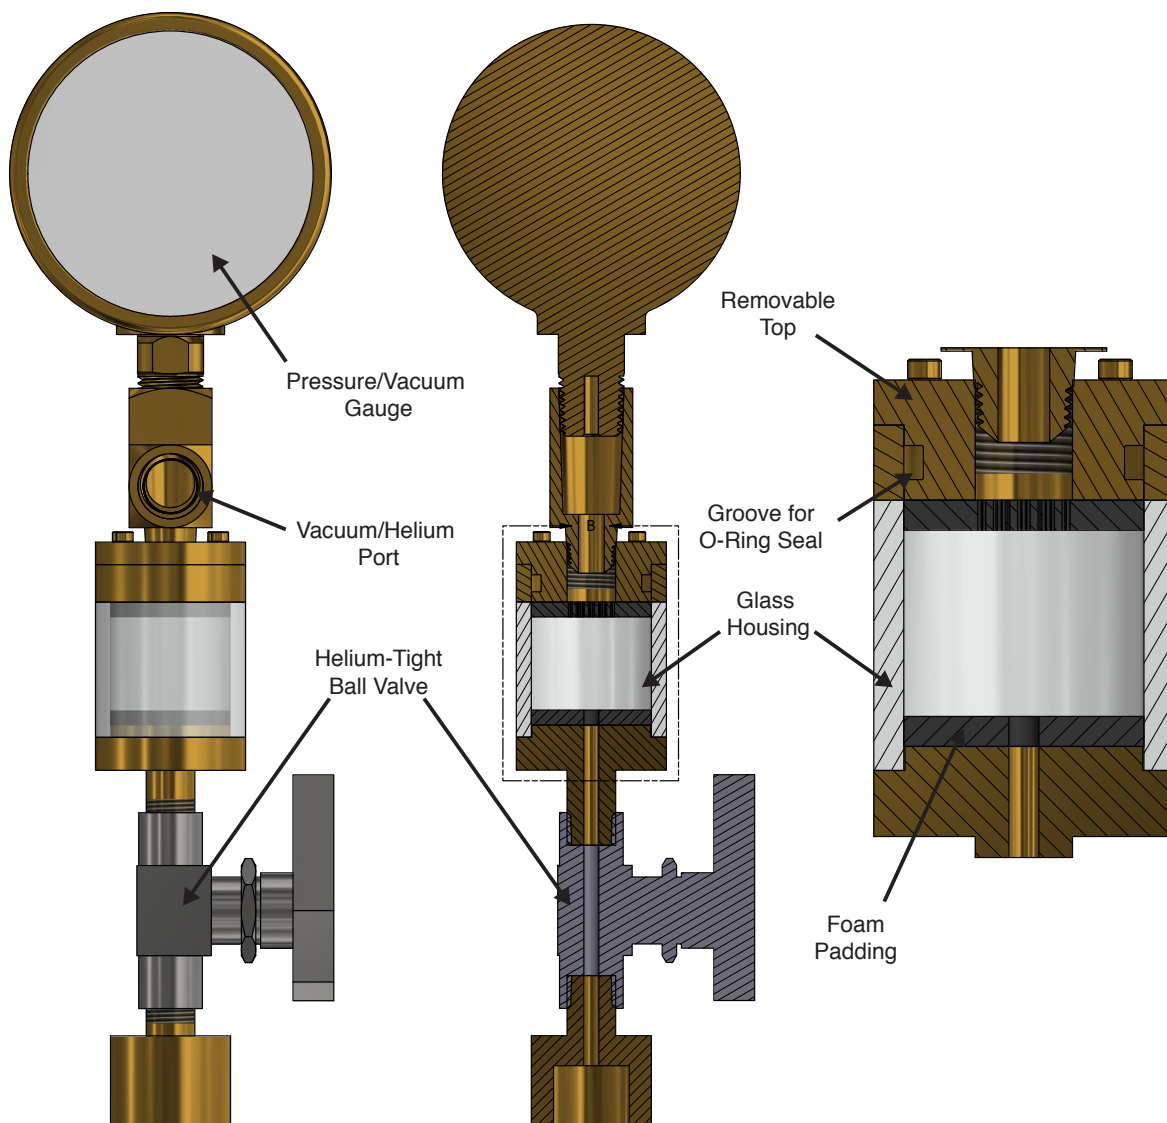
Sample exchanger assembly. This apparatus can be used to insert and eject rotors without introducing air into the system.
